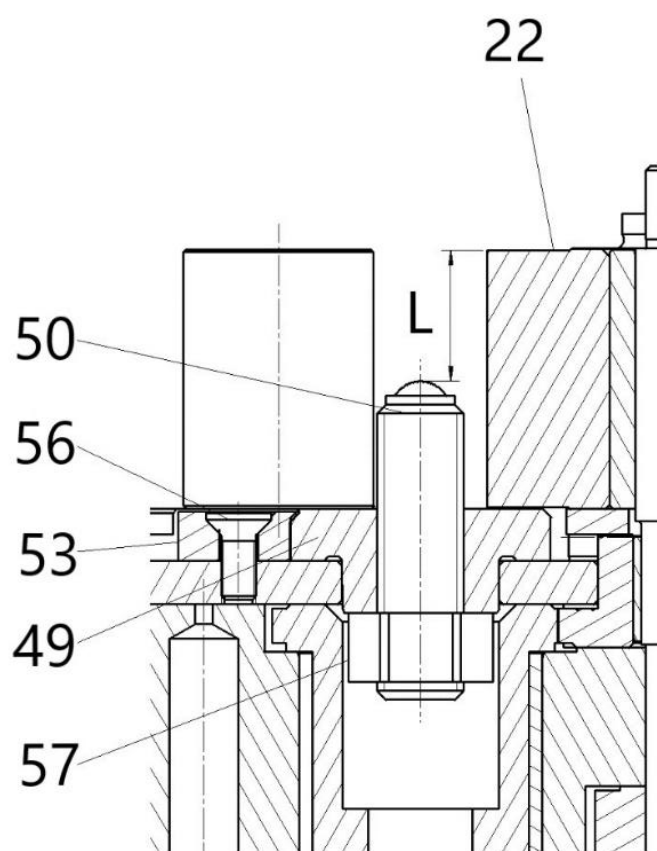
Setting the thread using the *rolling system radial EW 2/2
